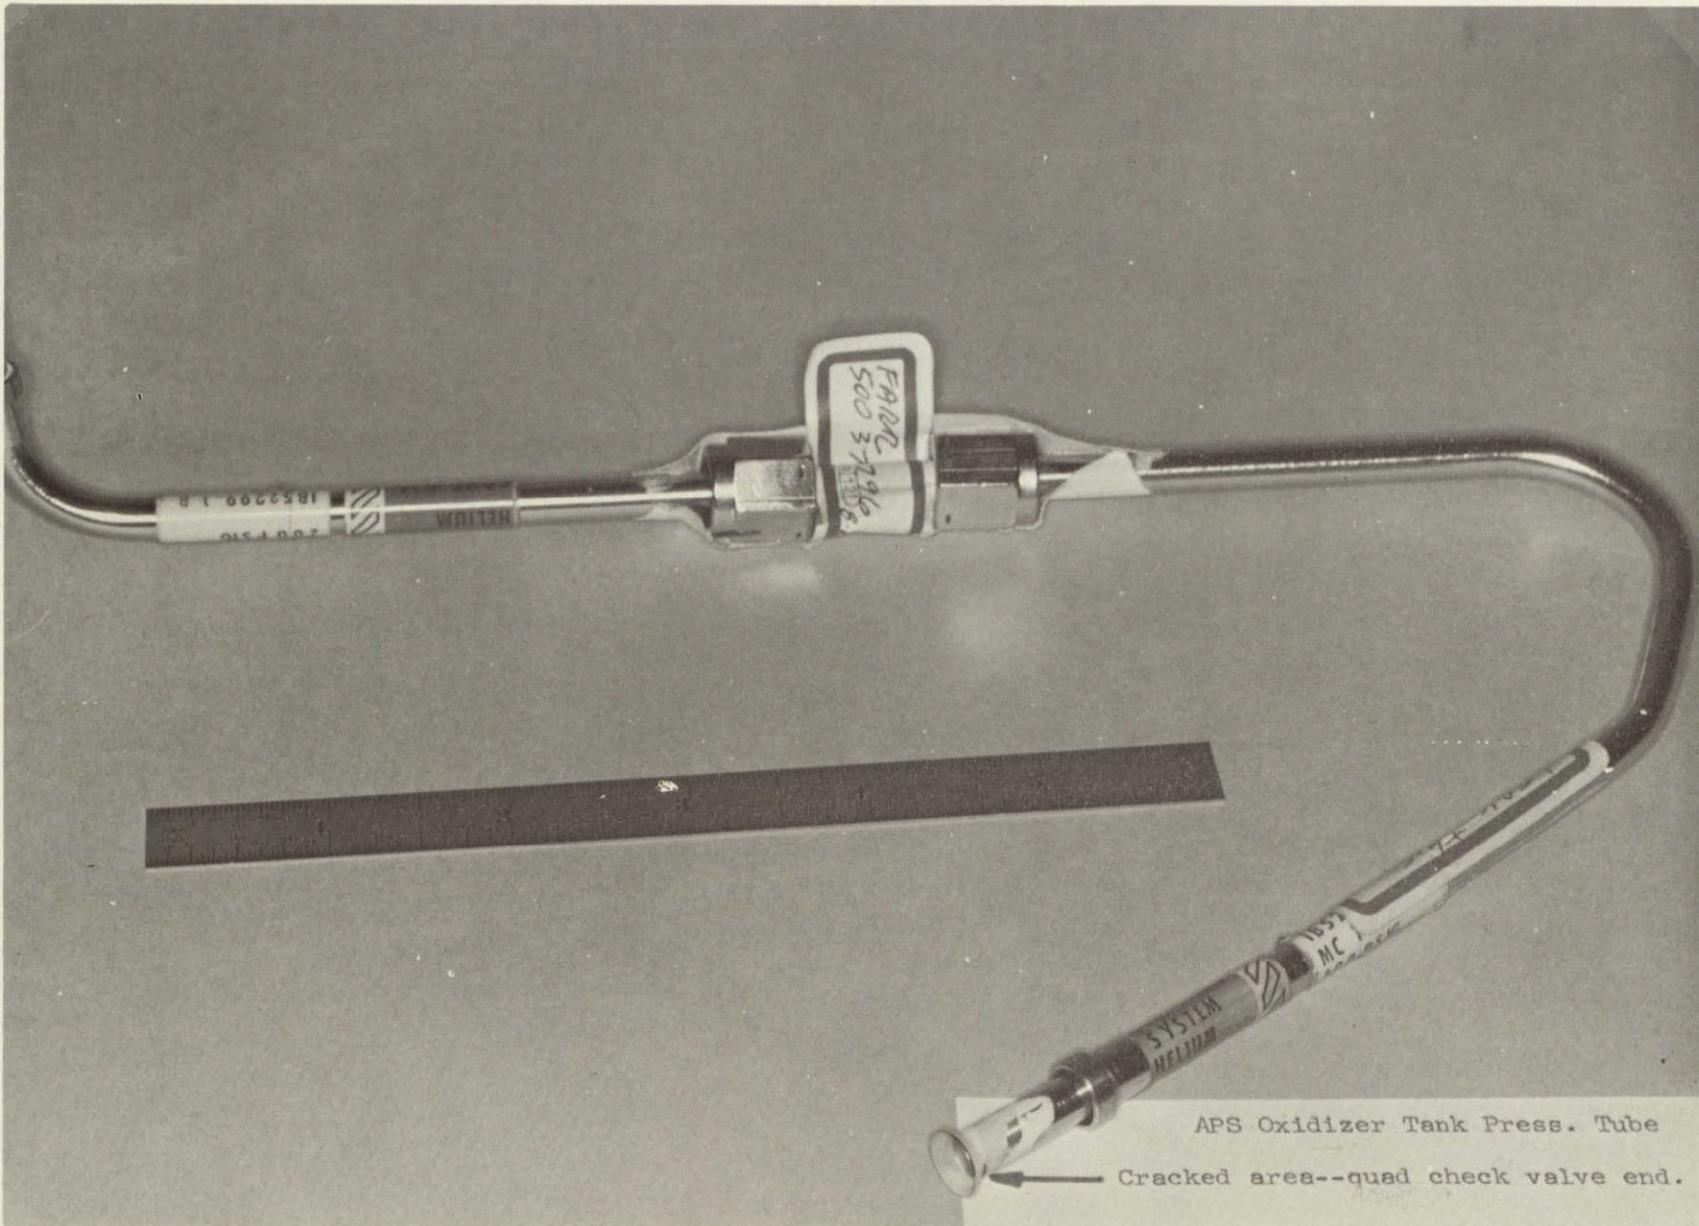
Helium Pressurization Tube Assembly (Sheet 1 of 2)
